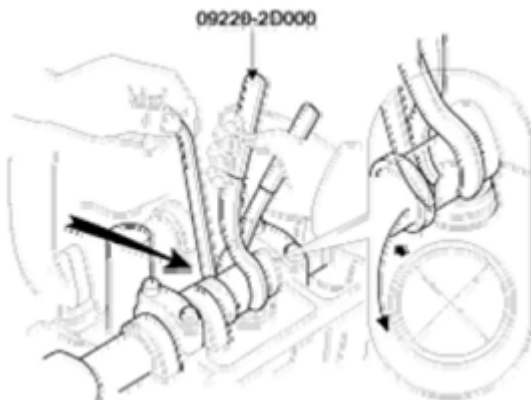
Adjusting Intake & Exhaust Valve Clearance
